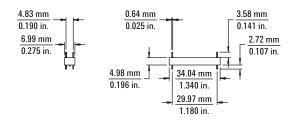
E5394A and E5396A soft touch probe dimensions
